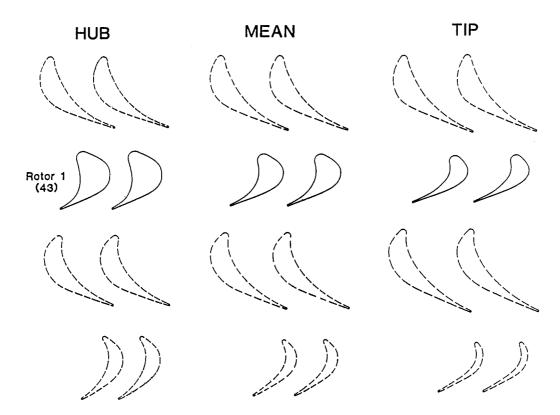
REVISED ROTOR BLADE GEOMETRY.
